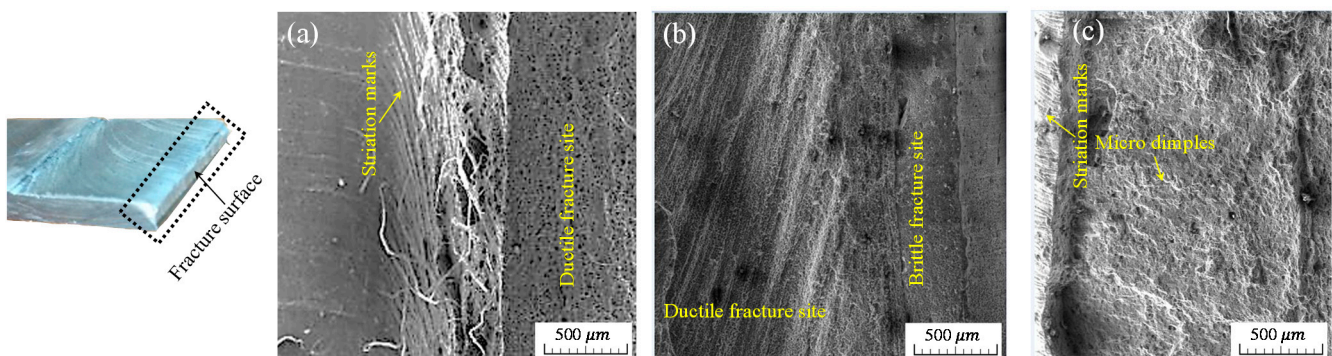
SEM images of fracture surface: (a) as-welded FSW samples; (b,c) in situ rolled FSW samples.
